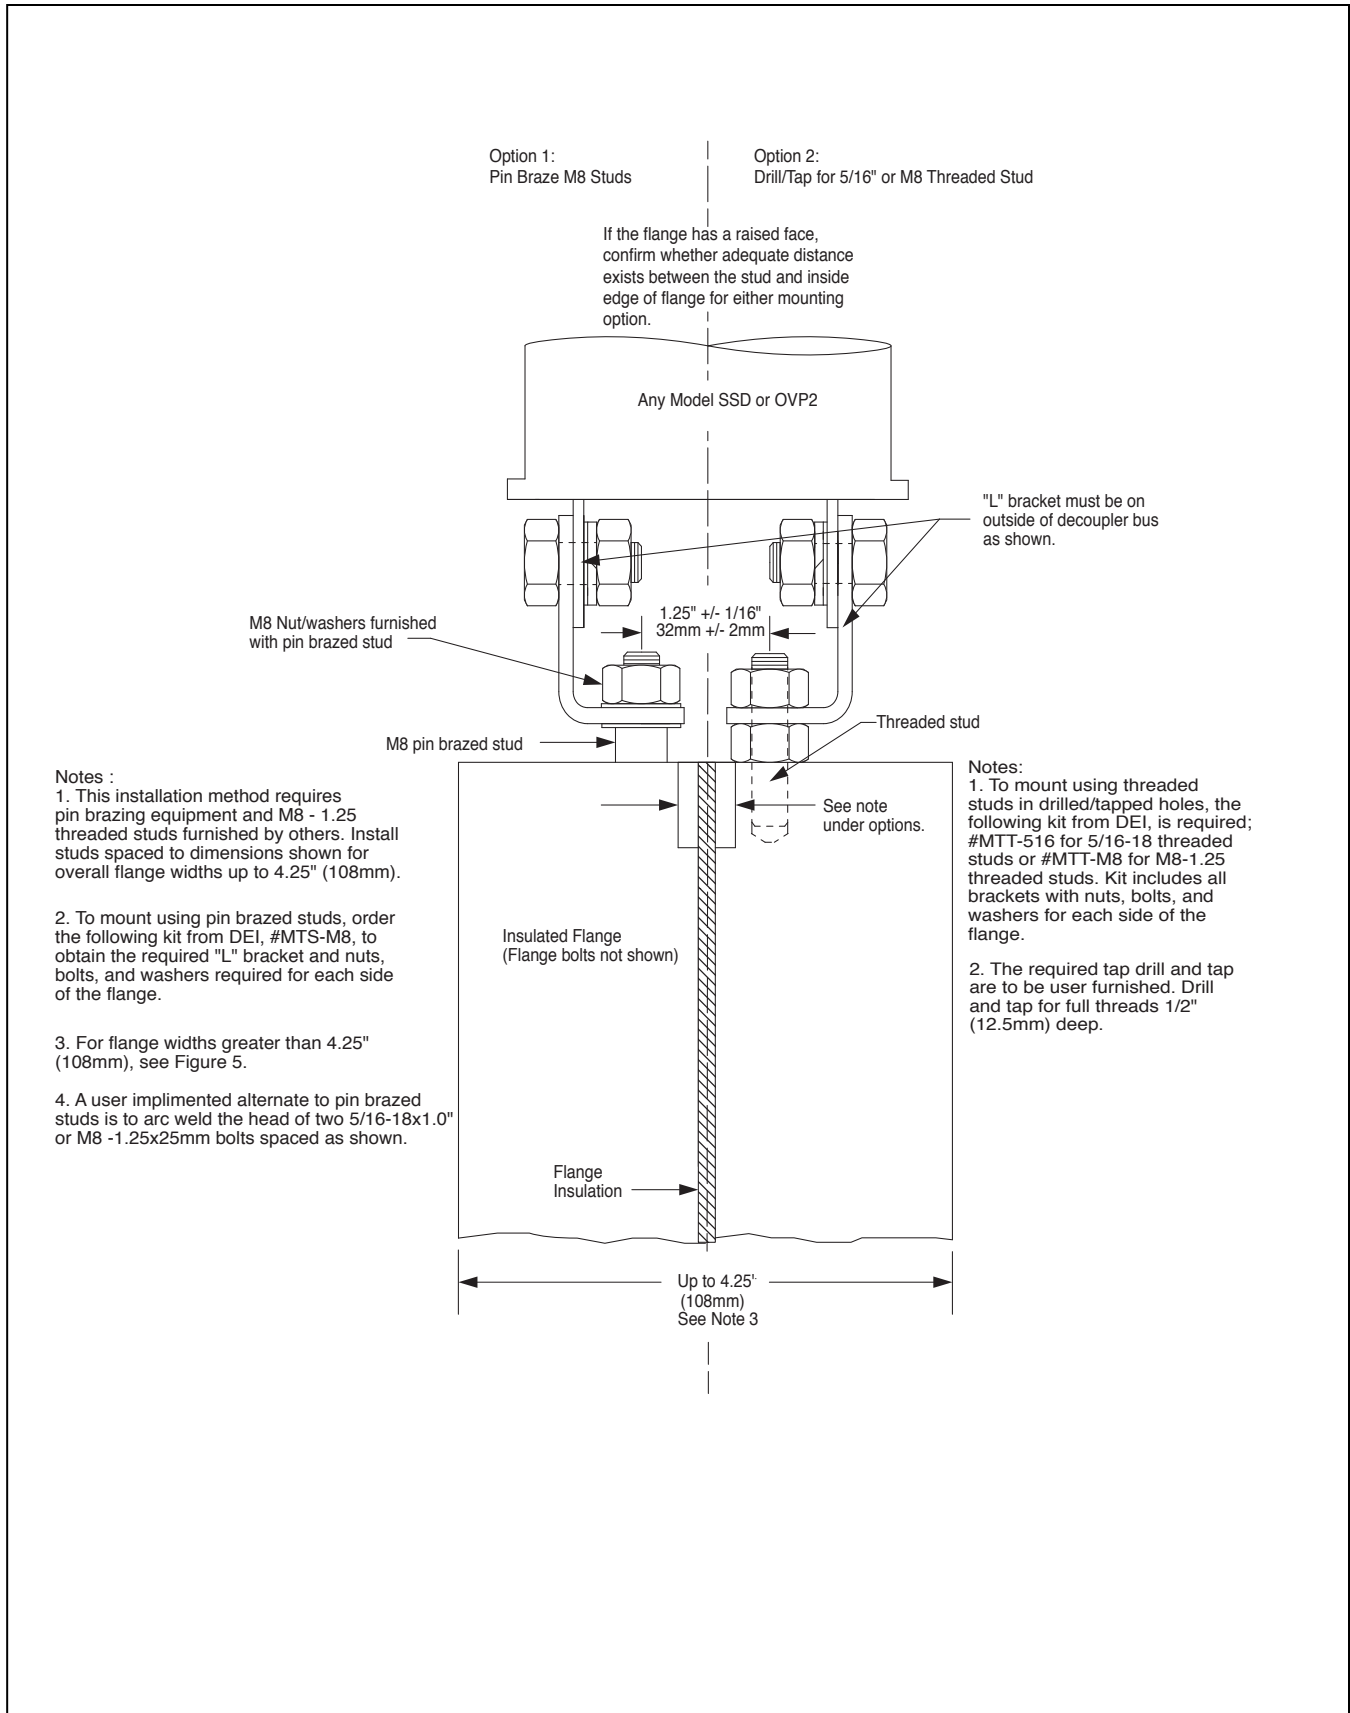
Flange Mount Using Tapped Holes or Pin Brazed Studs
